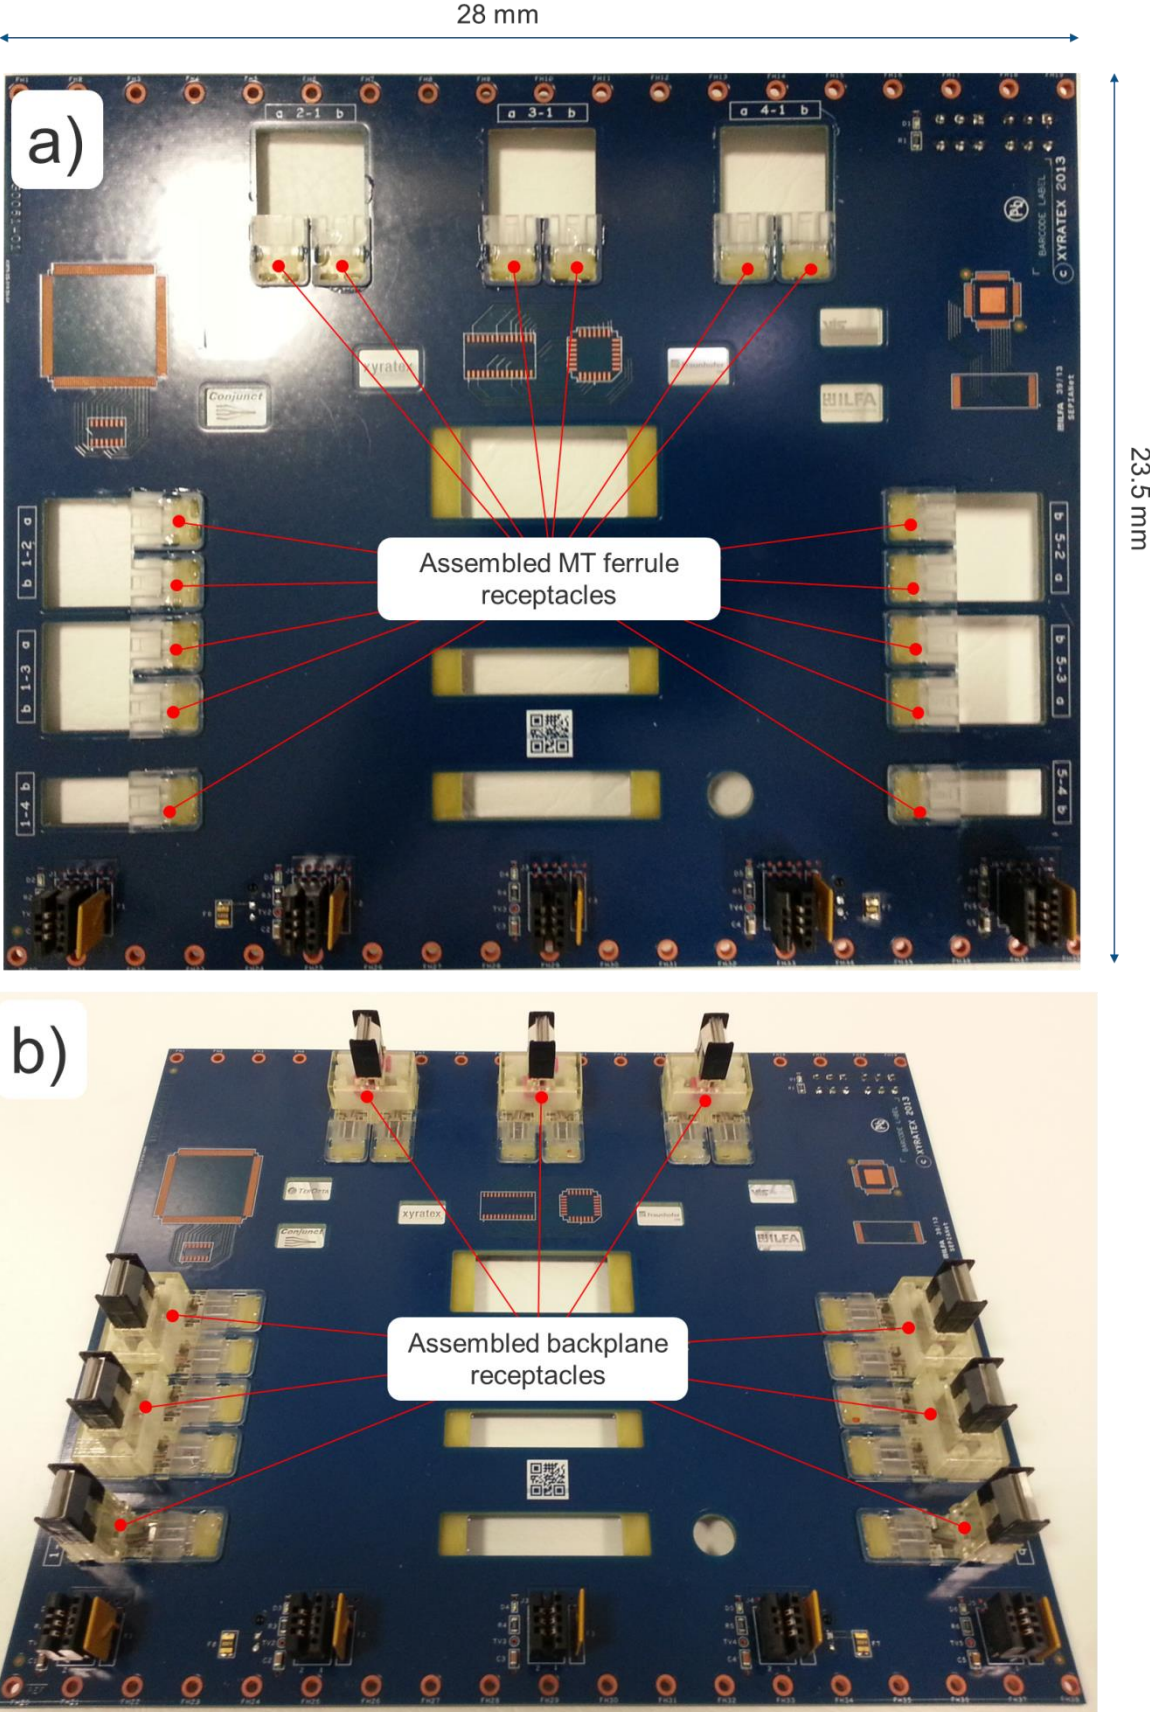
a) SEPPLANE1 after assembly of all MT ferrule receptacles, b) SEPPLANE1 after assembly of all backplane receptacles
